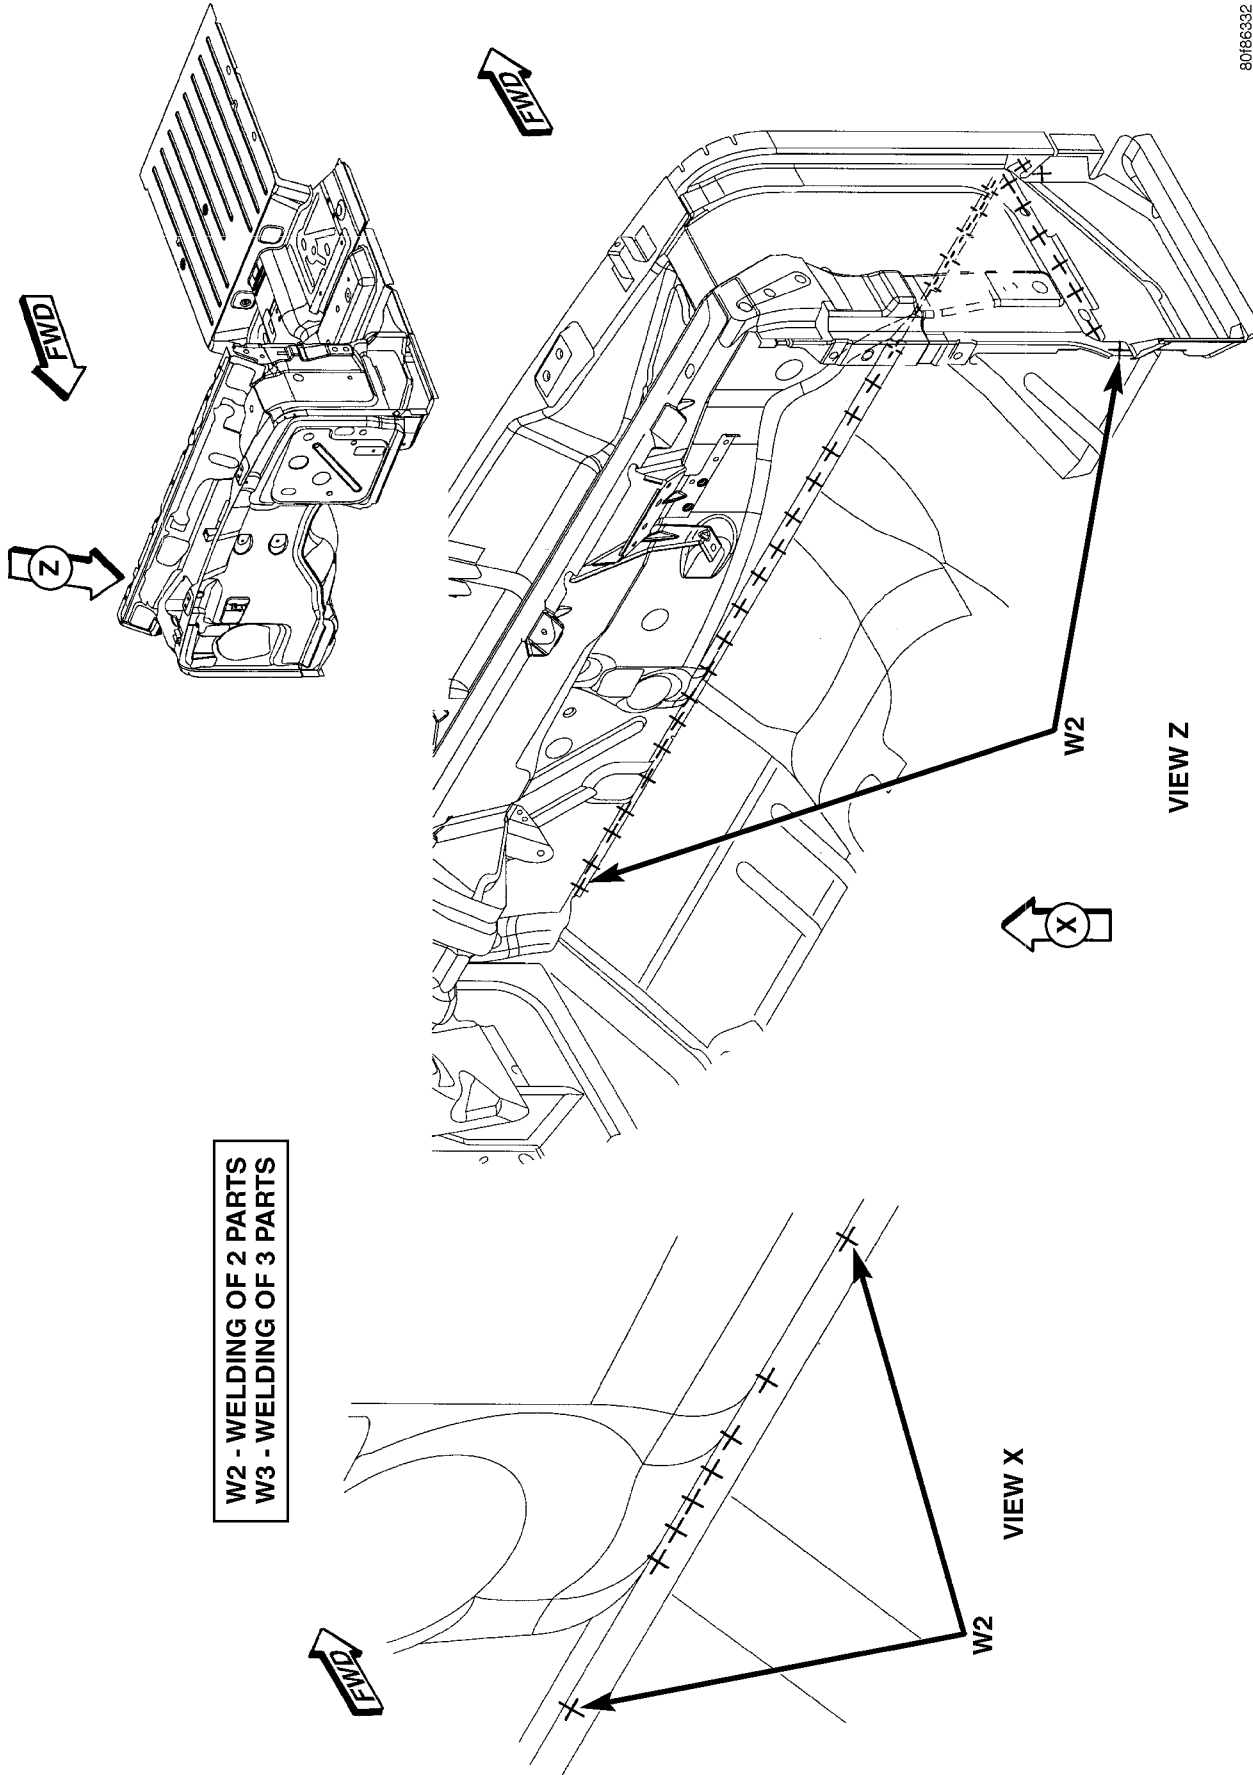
DASH, COWL AND FLOOR ASSEMBLY - LEFT HAND DRIVE
